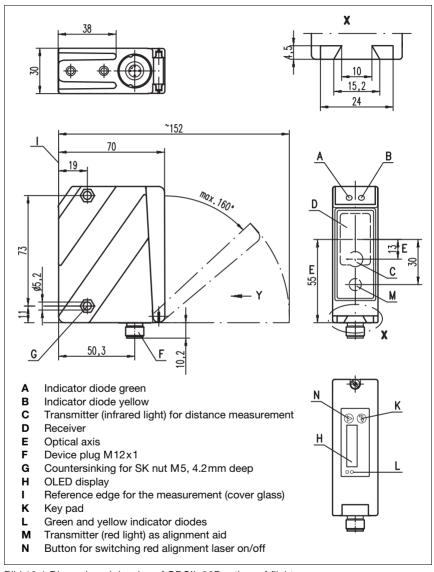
Dimensioned drawing of ODSIL 96B... time-of-flight sensors
